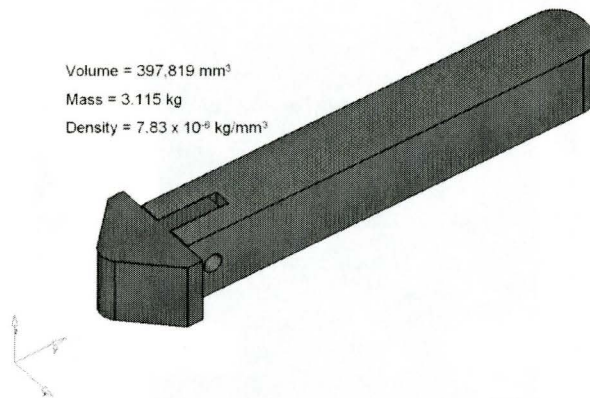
CAD model of the punch assembly used in the V-die assembly used to calculate the preload due to the weight of the punch.
